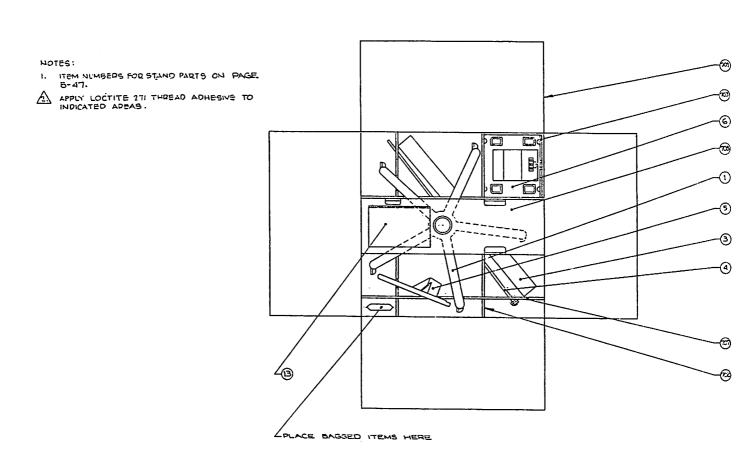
B. Model 1042 Instrument Stand Final Assembly
